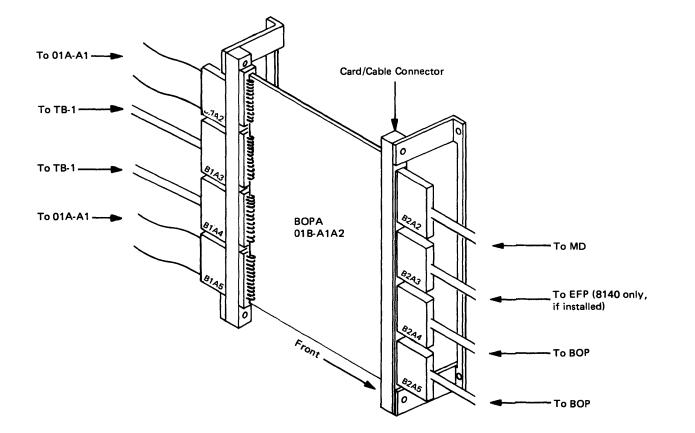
Basic Operator Panel Adapter Card (01B)
